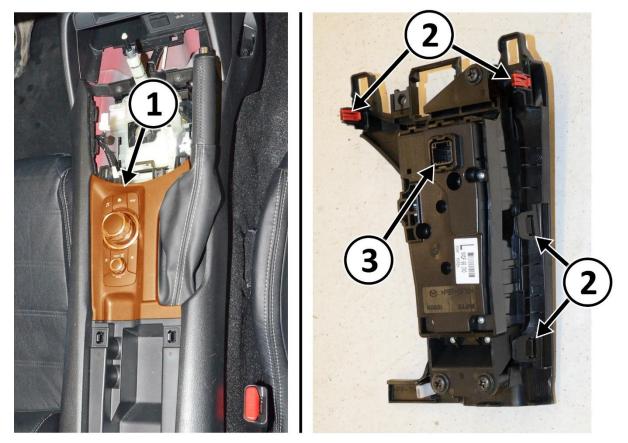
Center Console Radio Control Switch and Bezel Assembly
